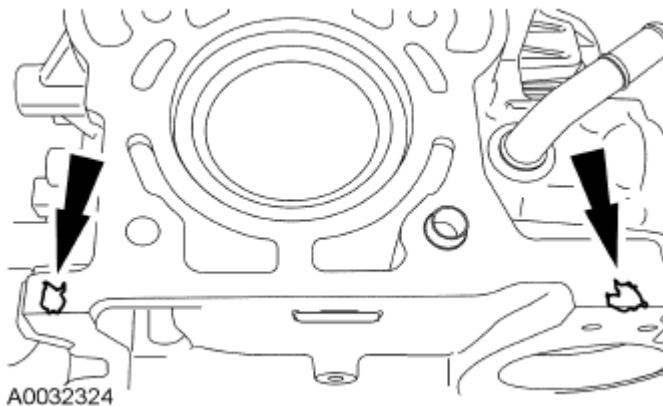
Locating Silicone Gasket And Sealant Apply Locations
